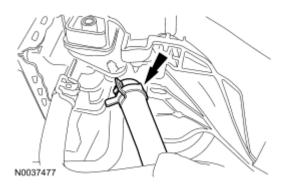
Locating Power Steering Cooler Tube Courtesy of FORD MOTOR CO.
